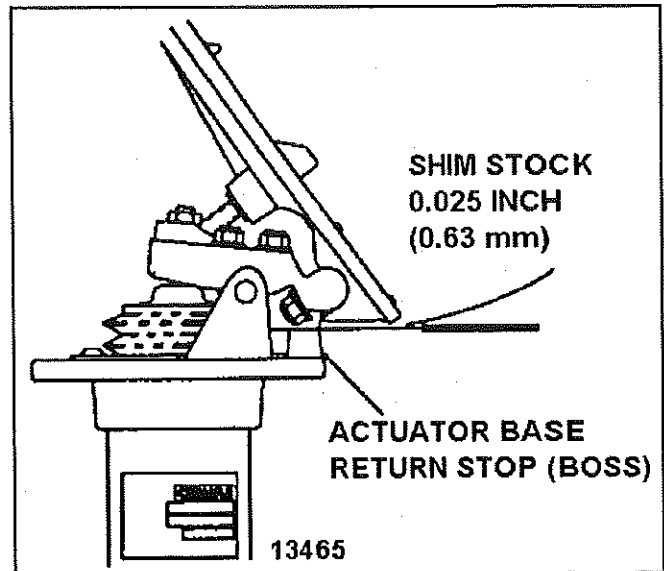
DEAD BAND ADJUSTMENT (13465)
